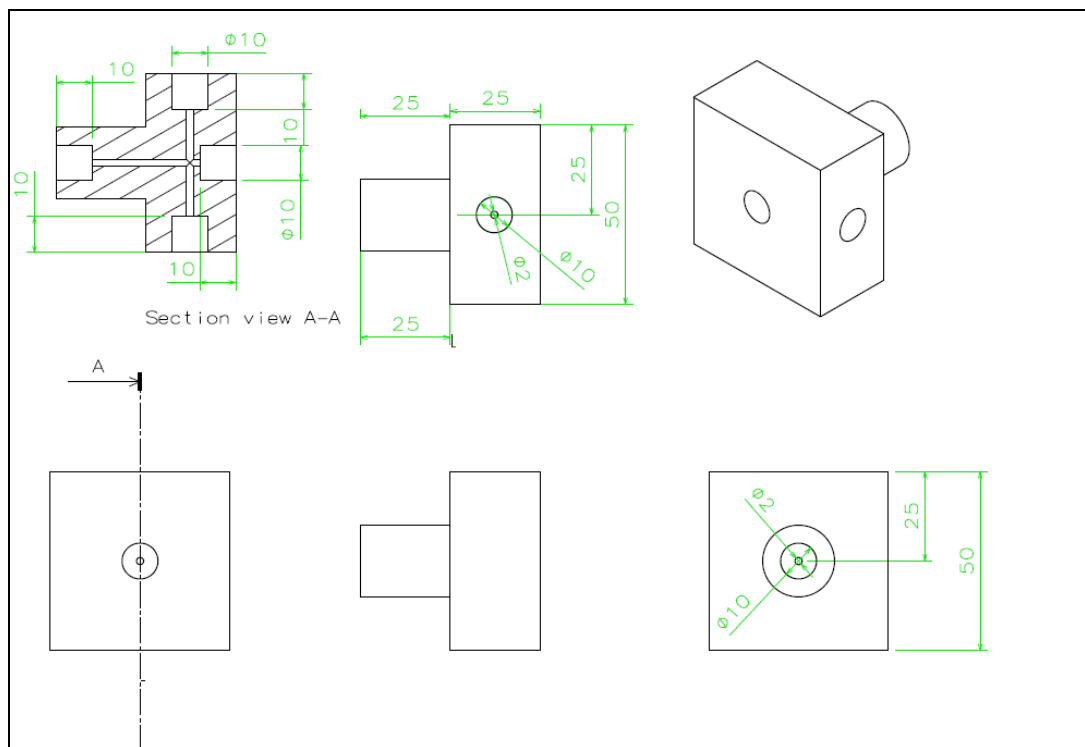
Technical Drawing of Pressure Transducer Adaptor
